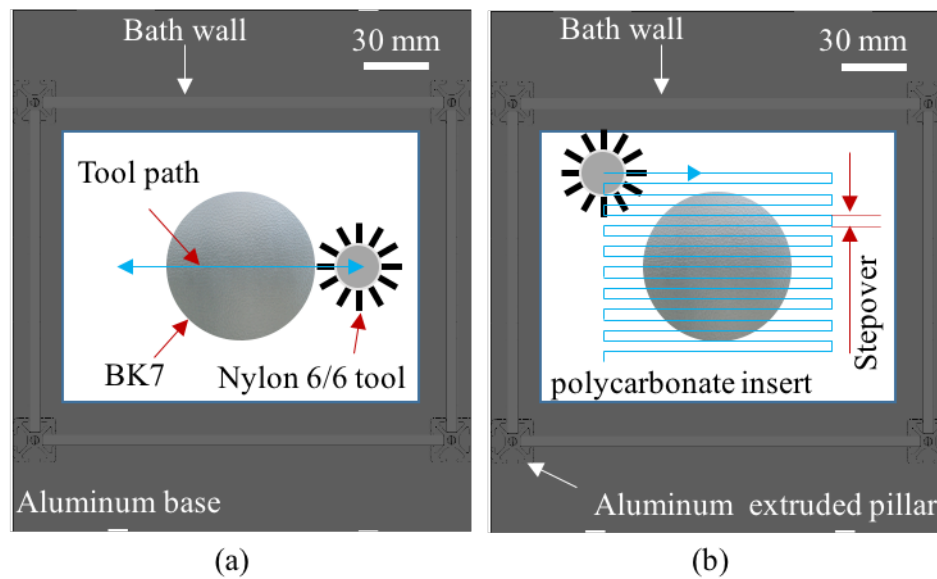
Polishing slurry bath setup (a) reciprocal tool path (b) raster tool path
